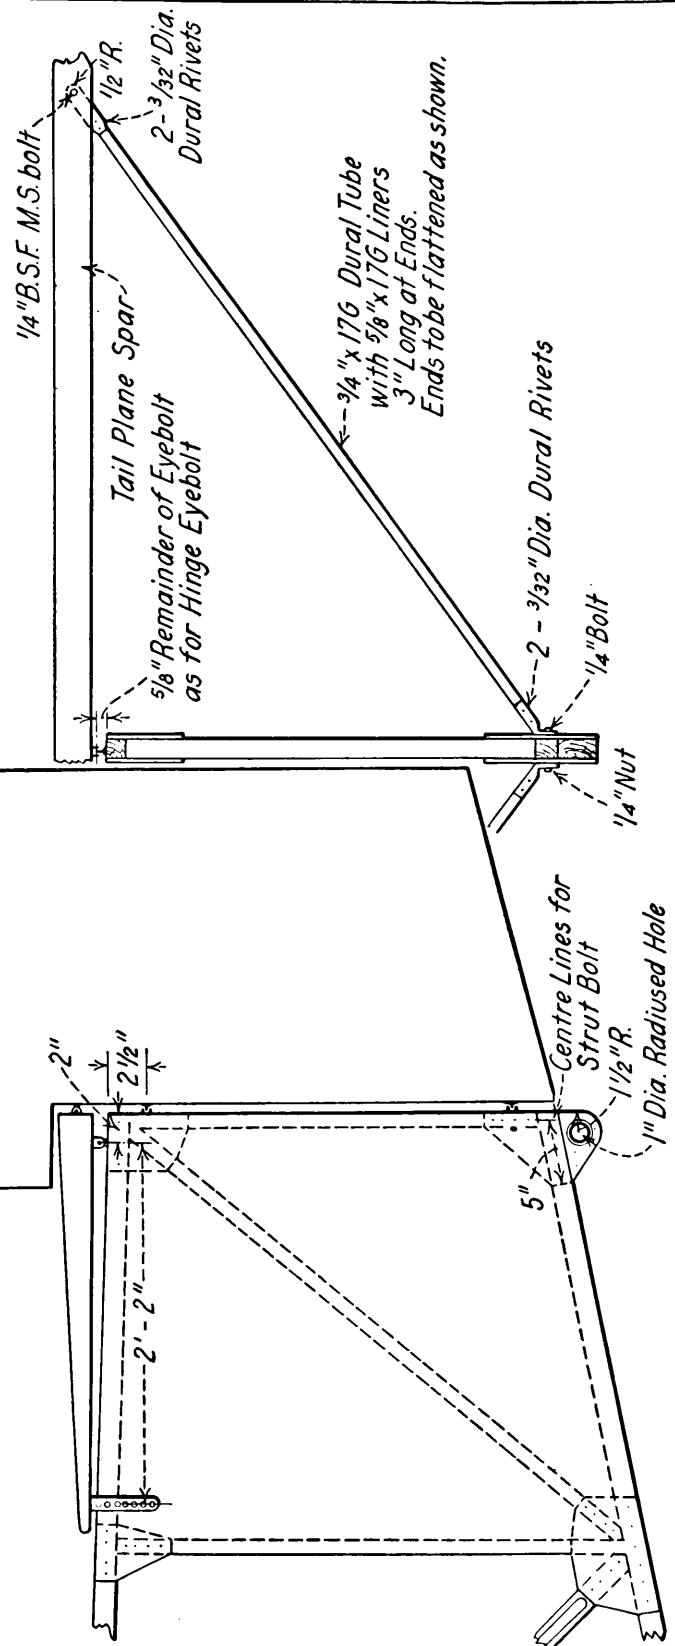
Assembly Drawing Showing How Tail is Assembled on the Fuselage of Dickson Training Glider.
